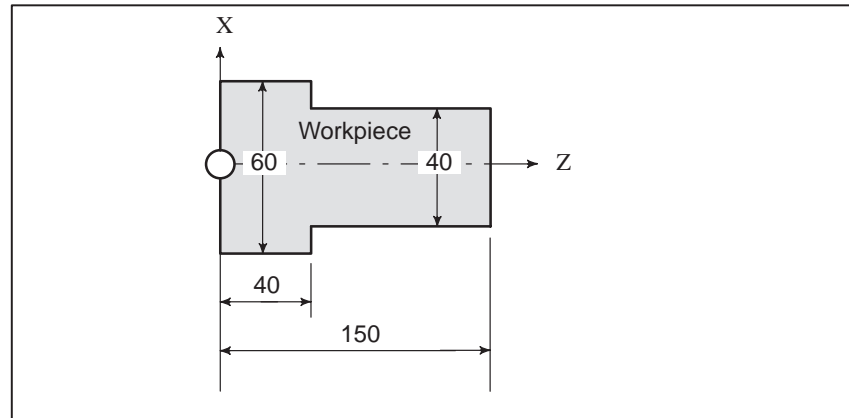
(c) Coordinates and dimensions on part drawing
